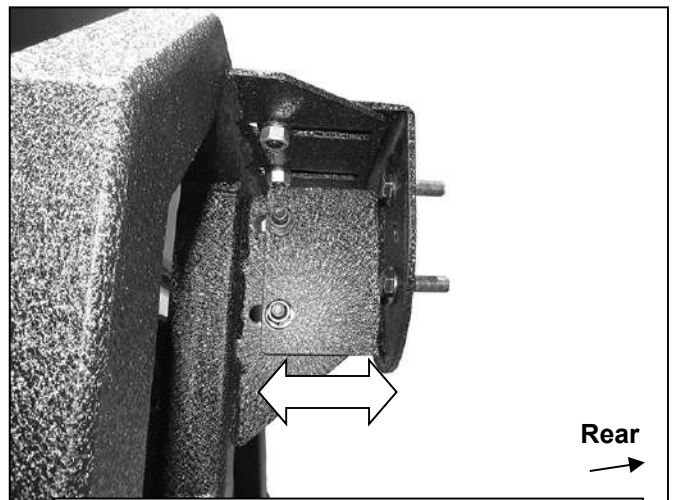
Insert (3) Wheel Bolts into Tire Mount
